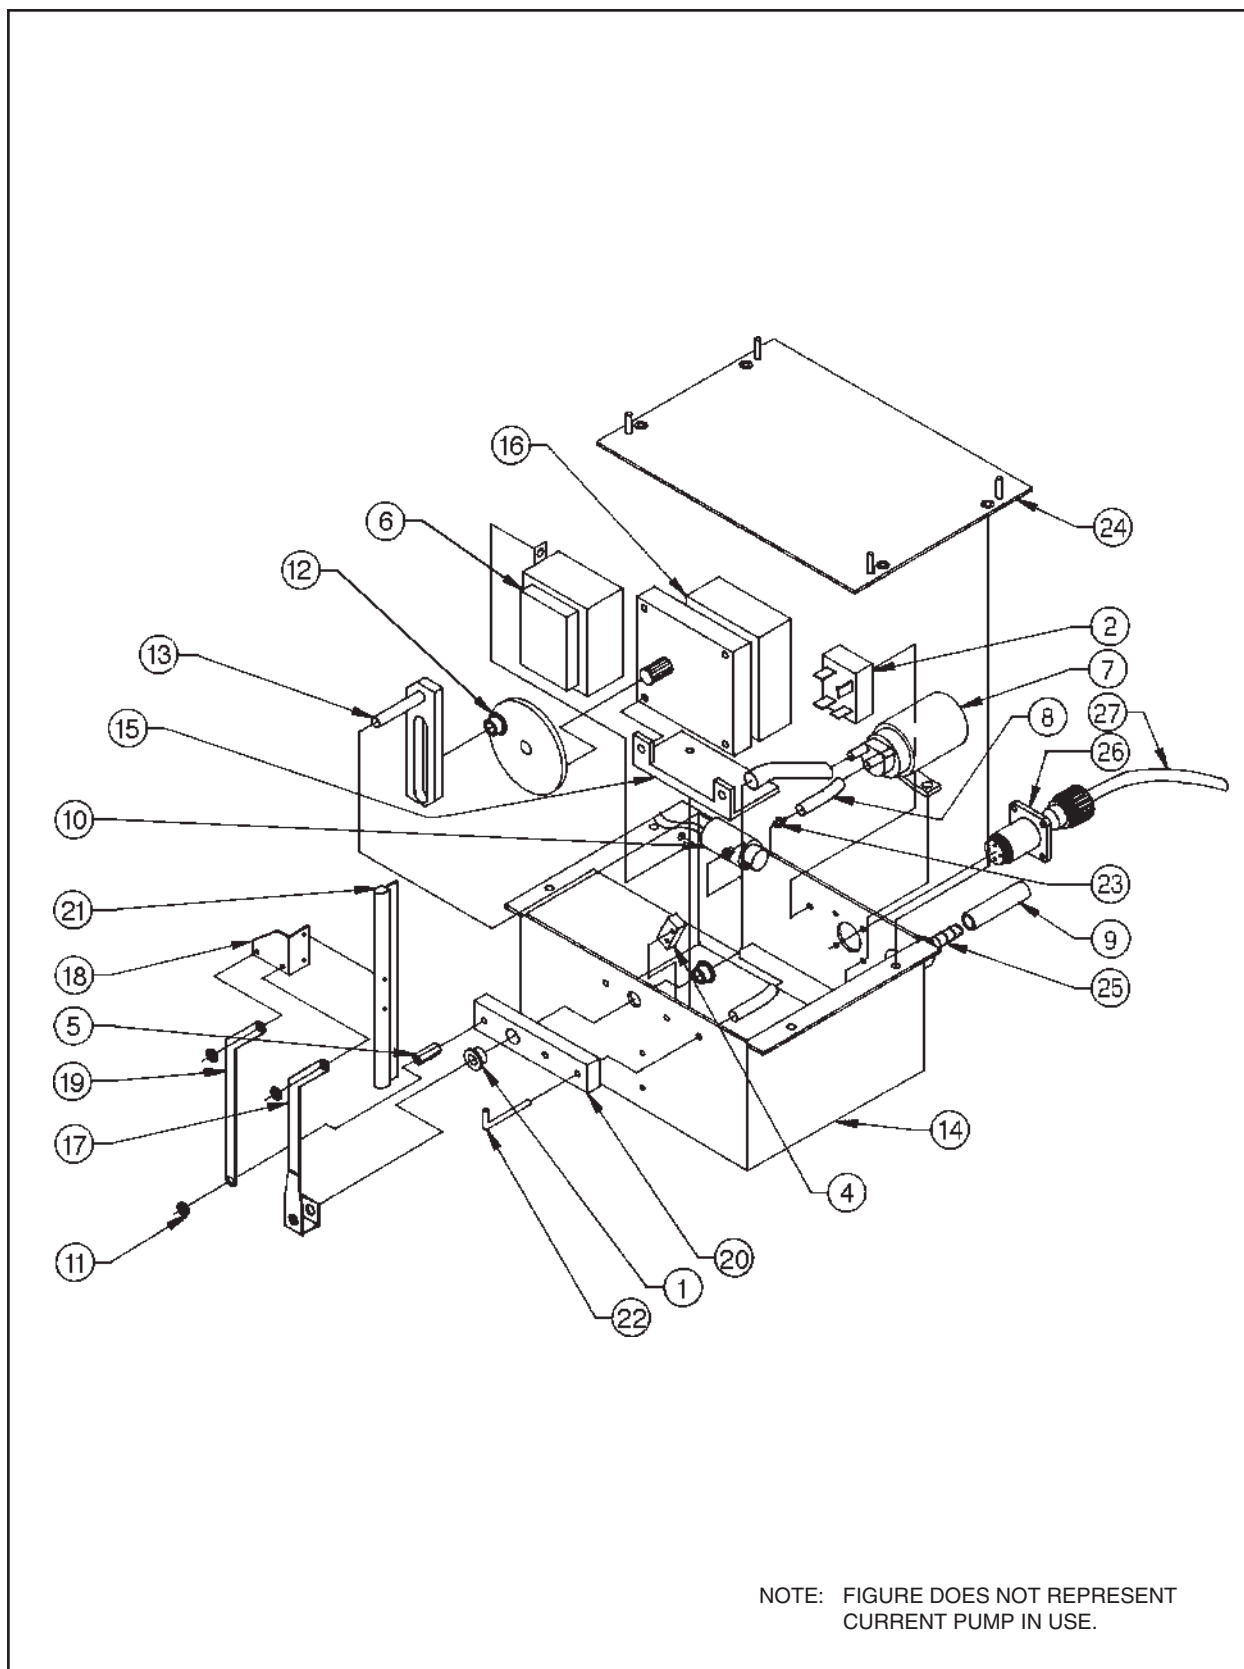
WW66, WW66-5/220 Wiper Exploded Assembly Diagram
